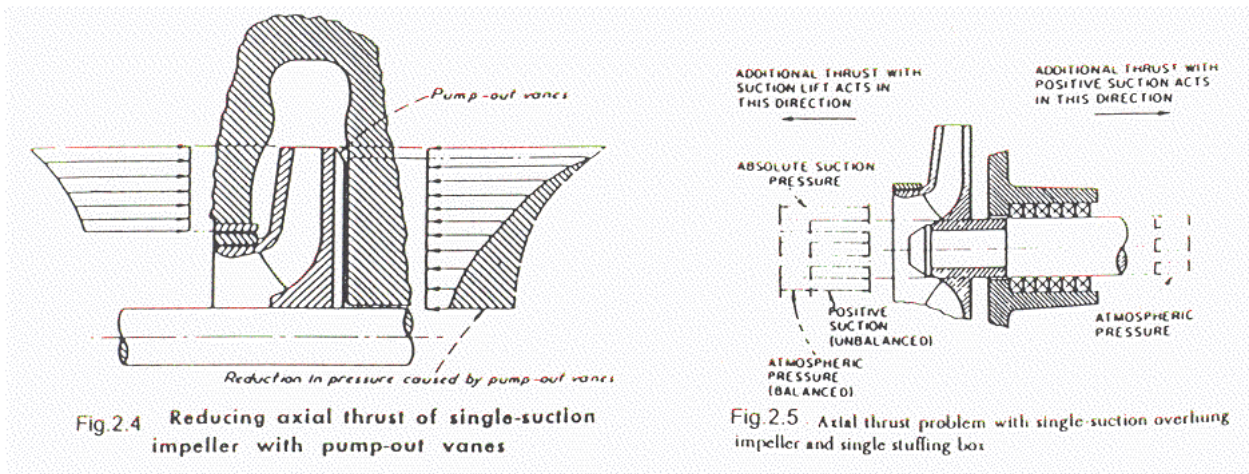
Reducing axial thrust of single-suction impeller with pump-out vanes
